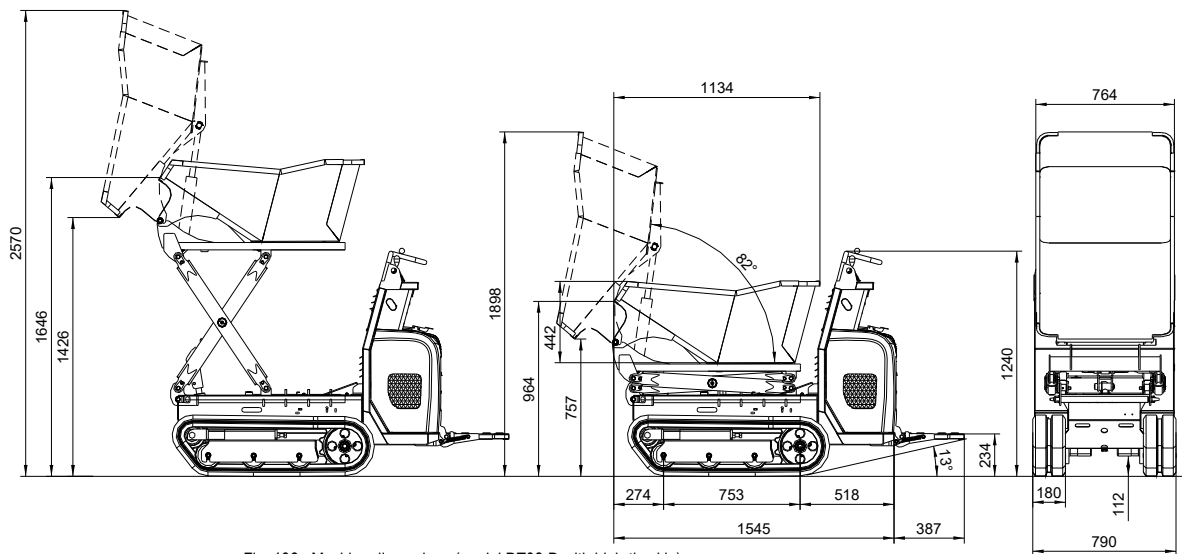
Machine dimensions (model DT08-D with high-tip skip)
